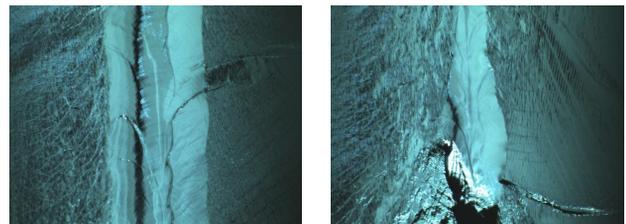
Stable (left) and unstable (right) welding beads for the R-1 cavity.
